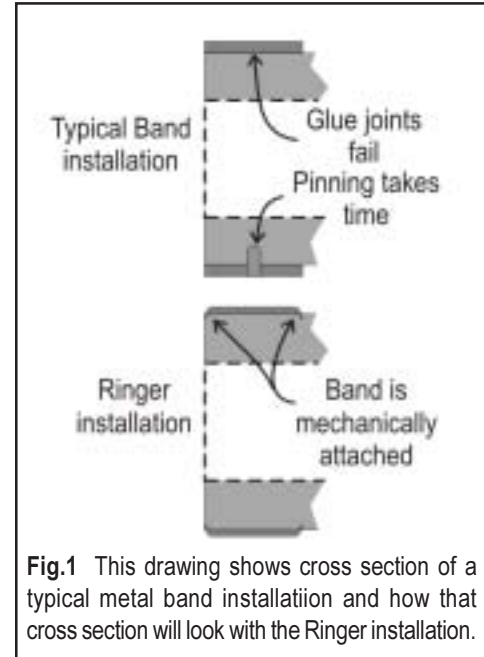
This drawing shows cross section of a typical metal band installation and how that cross section will look with the Ringer installation.
